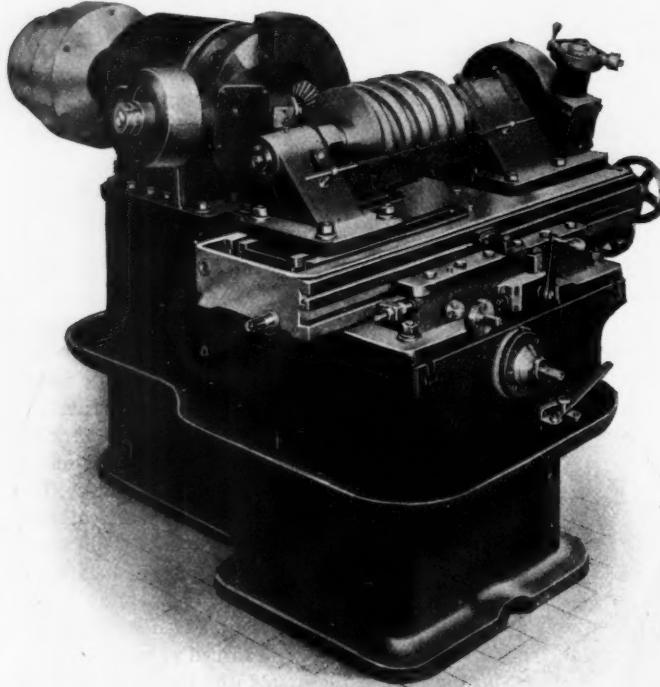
Schuchardt & Schutte Worm Milling Machine
